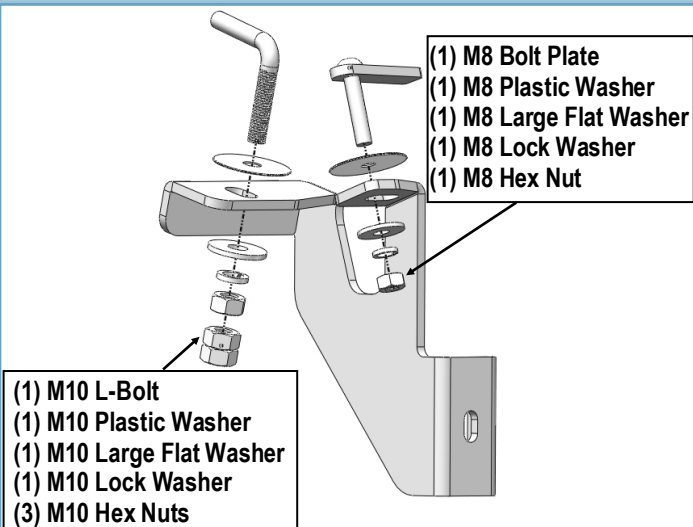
B) M8 Bolt Plate & M10 L-Bolt Installed into Passenger Front Mounting Holes
